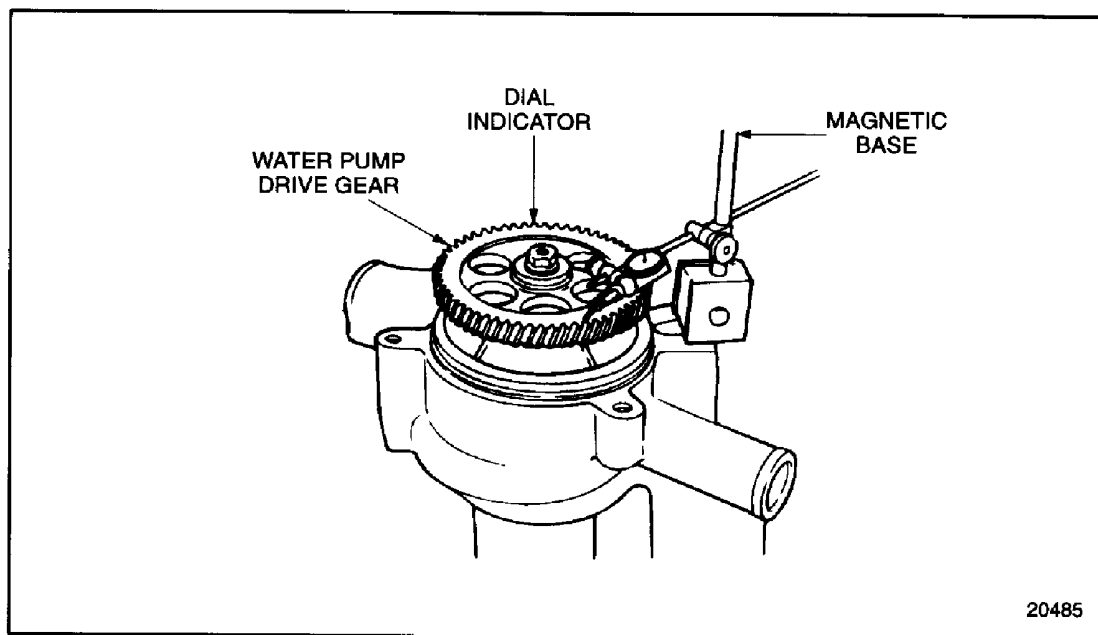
Measuring Water Pump Drive Gear Run-Out
